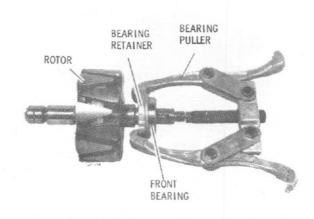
FRONT BEARING & RETAINER REMOVAL
